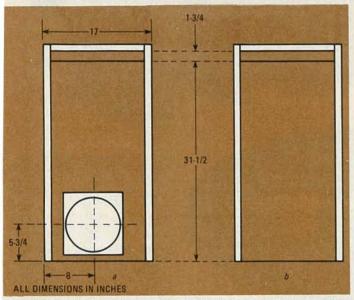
SPEAKER SHOULD BE MOUNTED slightly off-center to prevent standing waves. Center figure shows distance between partition 1 and top of enclosure.
